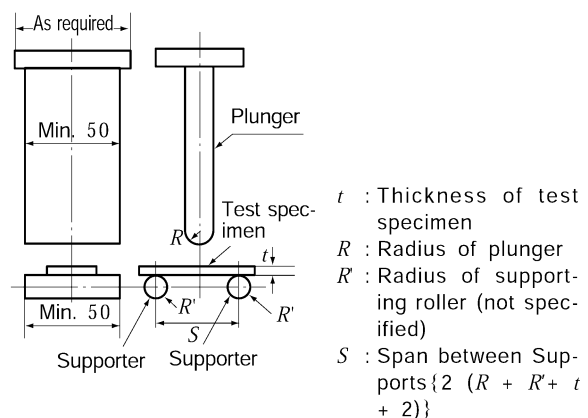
Jigs for Roller Bend Test (Unit: mm)
